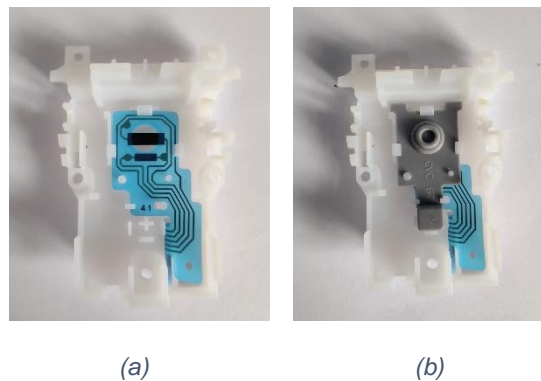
Assembly of the (a) flex PCB and the (b) Trigger button rubber mat
